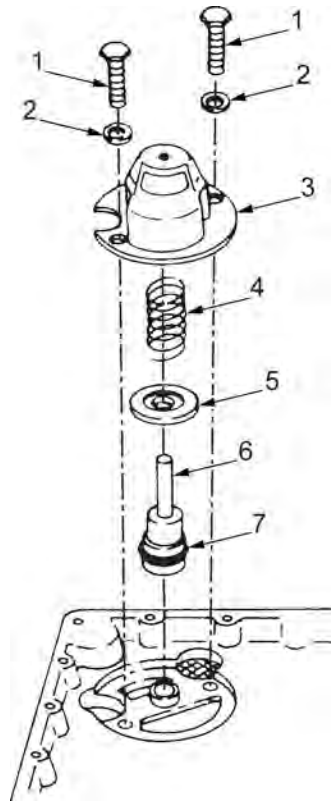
Equalizer Valve Housing, Valve, and Piston Assembly Removal.
